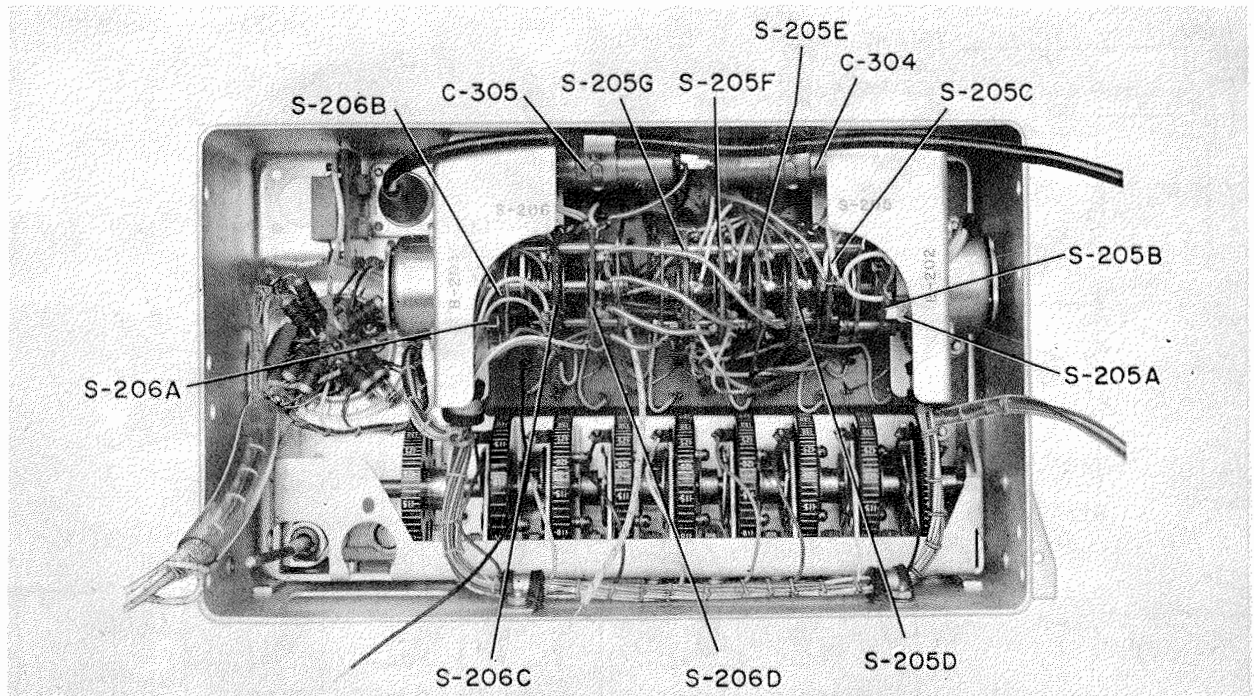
Radio Receiver R-608/ARC-49—Front Panel Assembly, Rear View
